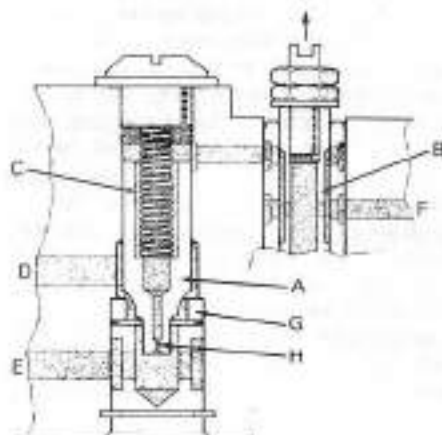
View showing pressure balanced valve operation. With spool valve (B) passage (F) open, fluid pressure above valve is lowered as flow through metering hole (H) is not sufficient to overcome loss through open spool valve. Thus, pressure in passage below valve pushes plunger (A) away from seat (G) allowing oil to flow out passage (D). Fluid flowing through metering hole flows out through passage (F).
